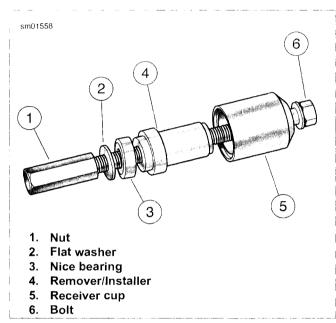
Connecting Rod Bushing Remover/Installer (Part No. HD-95970-32D)
